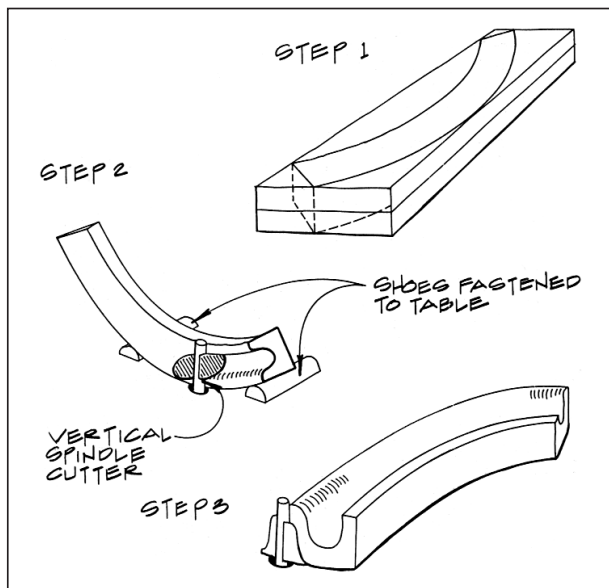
Step 1: glue up 2x14-inch mahogany and cut out blanks on a band saw. Step 2: fasten half-round dowel "shoes" to shaper table. Cut trough on shaper, "rocking" it on edge past the cutter. Step 3: cut the front "ogee" profile with the blank flat (bottom side down) on the shaper table.
